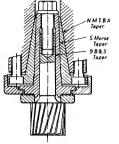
Adapter to Use B & S or Morse Taper within the Standardized Modern Taper
